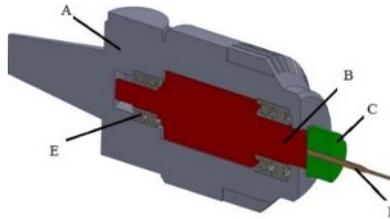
3D modelling of the spindle system (A: High speed spindle’s shell, B: Machine tool high speed spindle, C: Tool holder, D: Cutting tool, E: Bearings).
